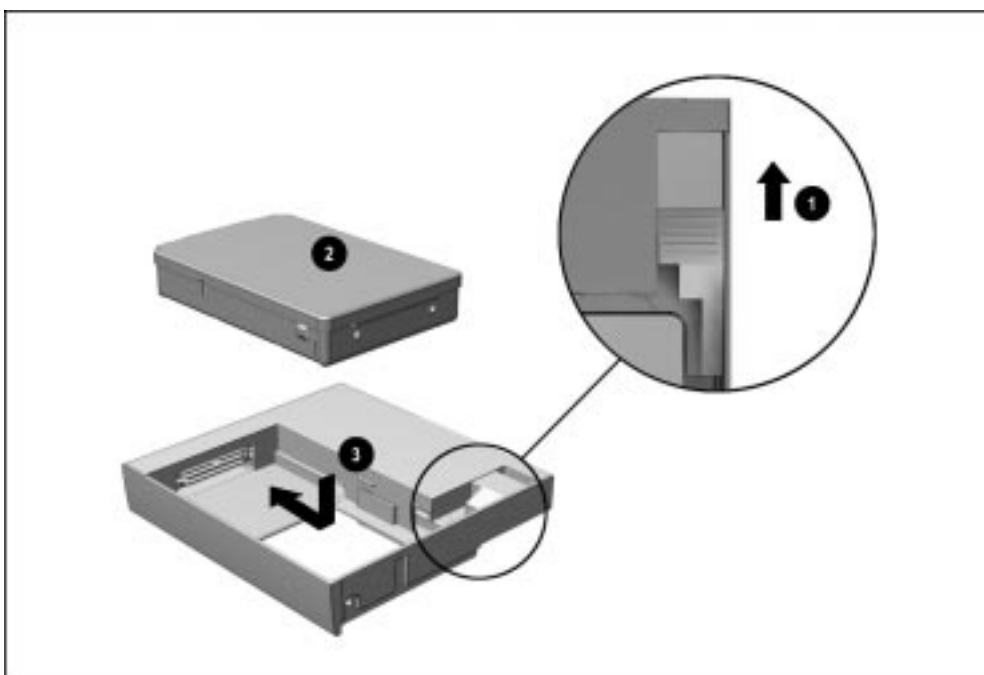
Inserting a Hard Drive into an Armada 7000 Hard Drive MultiBay Adapter
